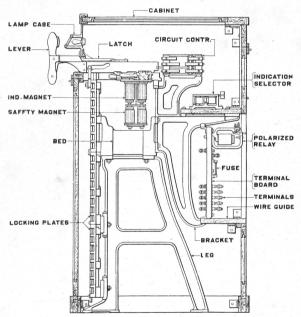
Cross Section of Model 2 Unit Lever Type Interlocking Machine
